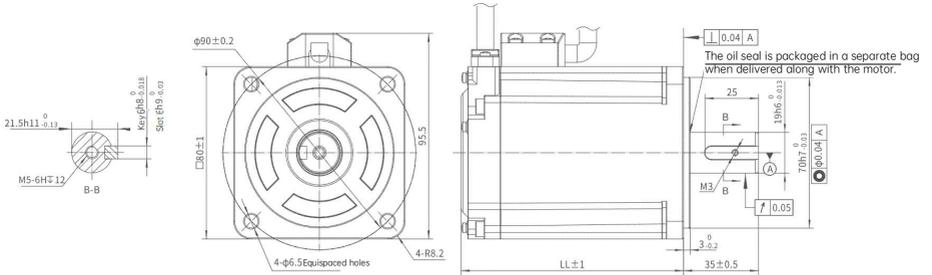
Frame No. 80 servo motor dimensions (without brake)
